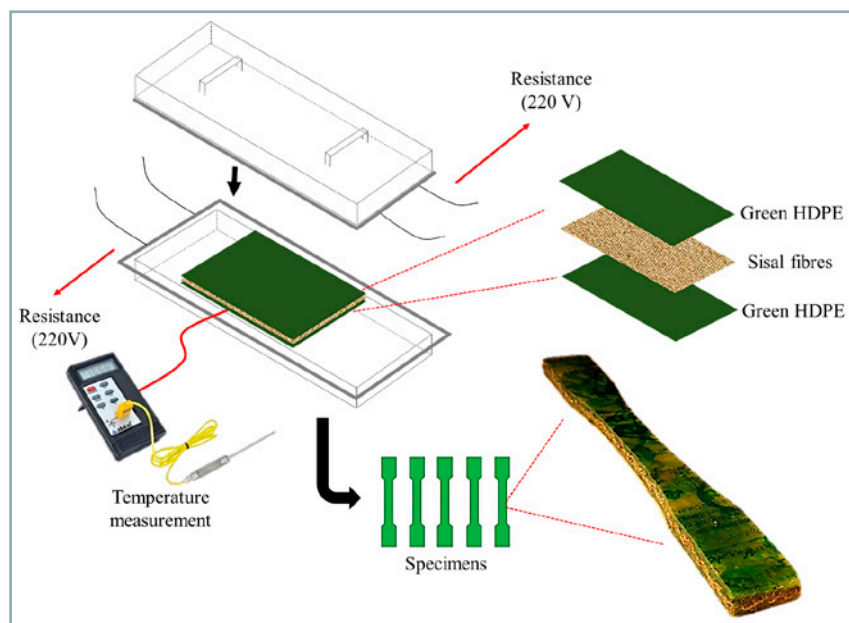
Process of hot compression moulding to make sisal HDPE composites
